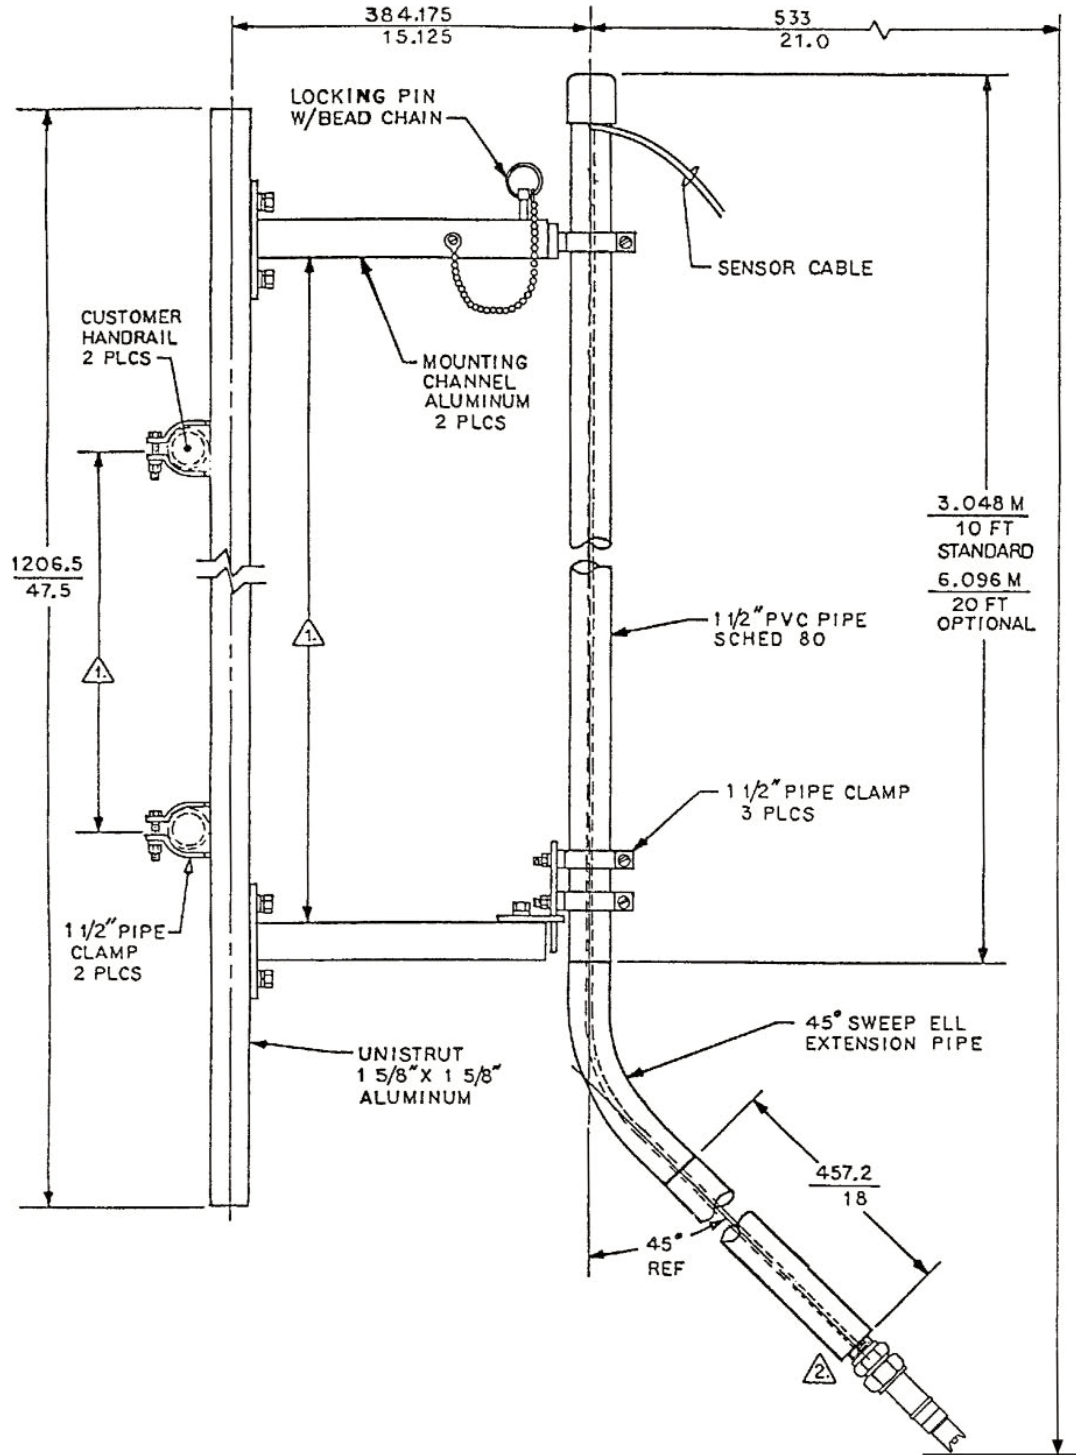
Rosemount 3500P or 3500VP for Submersion Installation using the Handrail Mounting Assembly (PN 11275-01)
